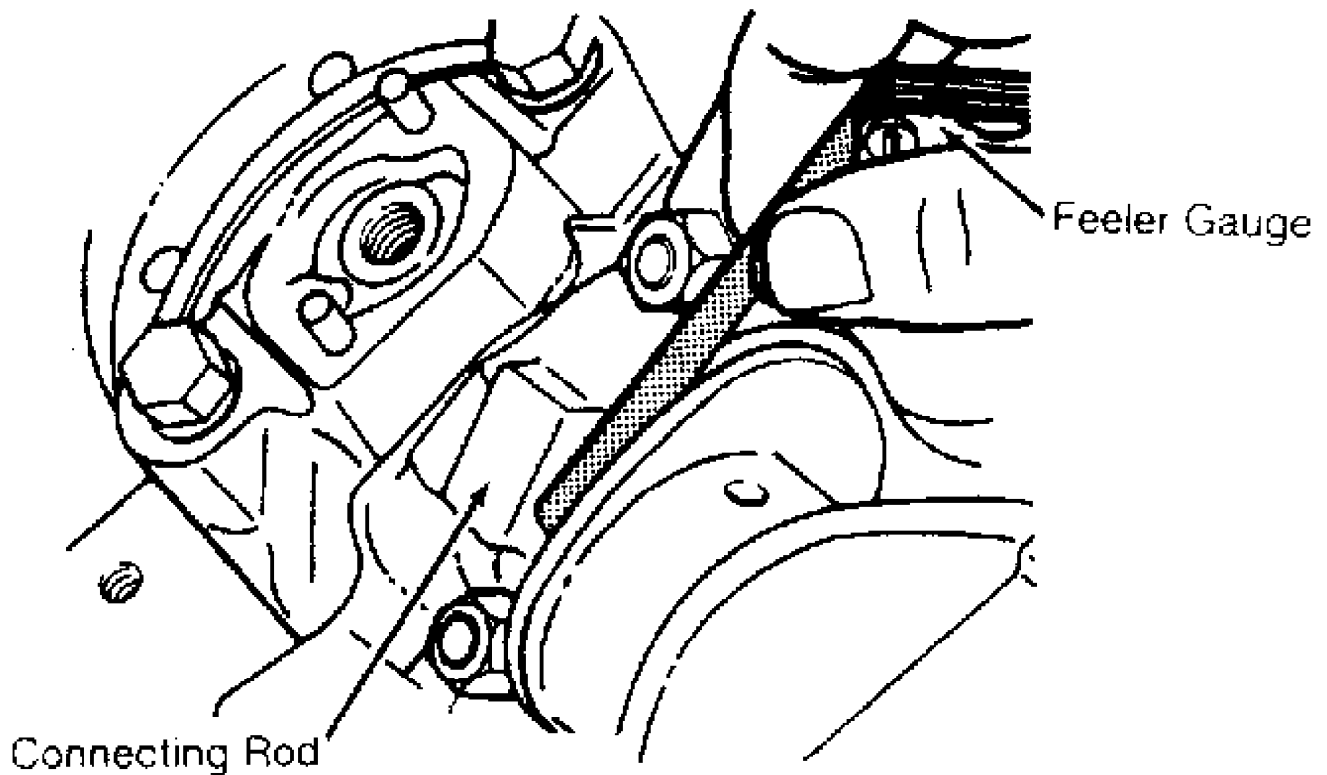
Measuring Connecting Rod Side Clearance - Typical
